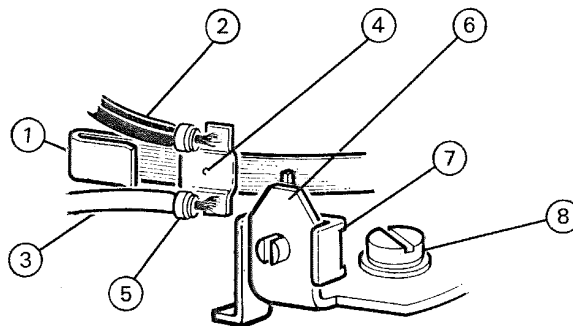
Contact-breaker and L.T. terminal arrangement (Dismantling and correct reassembly of L.T. terminal)
